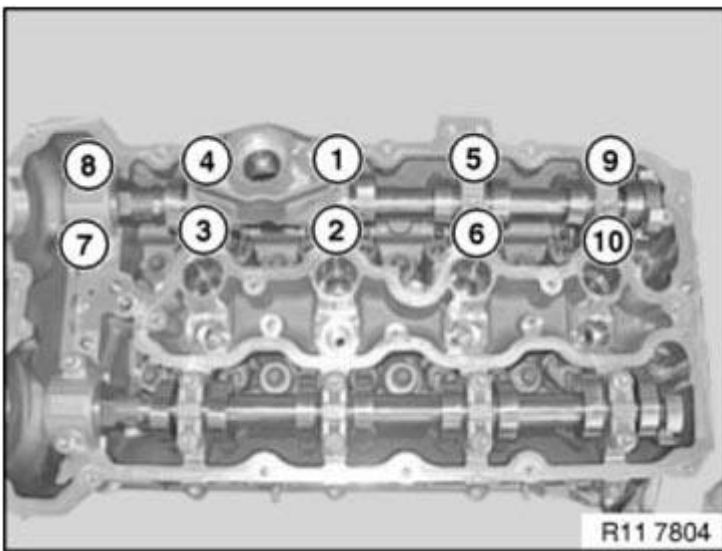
Identifying Camshaft Bearings Bolts Releasing Sequence
